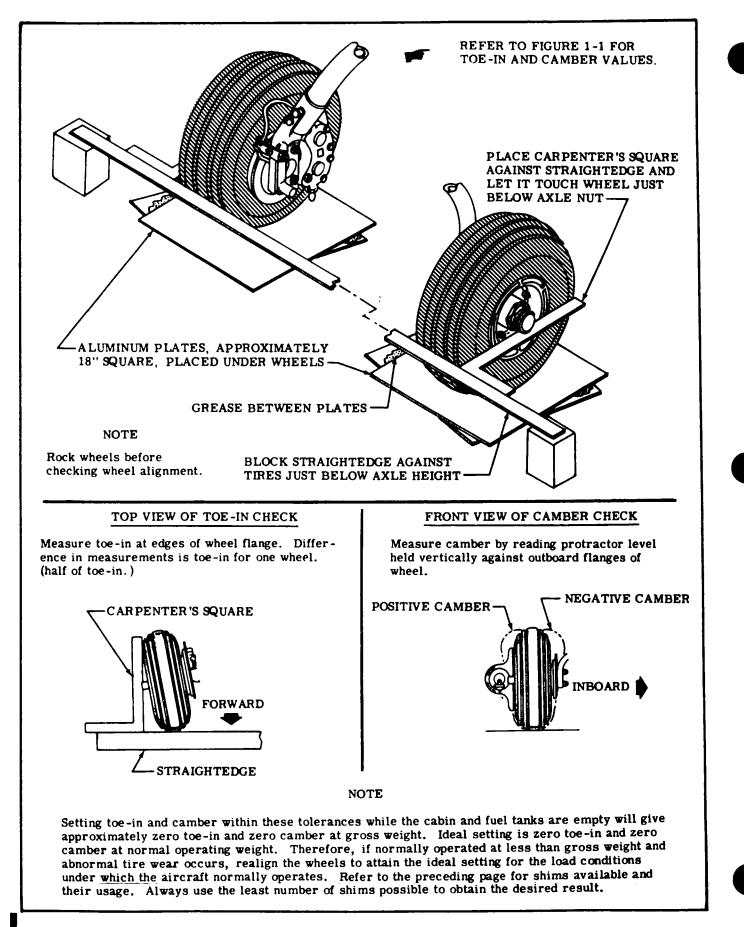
Main Wheel Alignment (Sheet 1 of 2)
